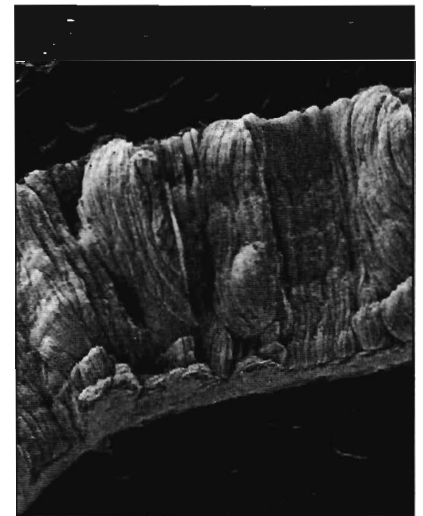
Lathe swarf surface of machined 95%Pt-5%Ru.
